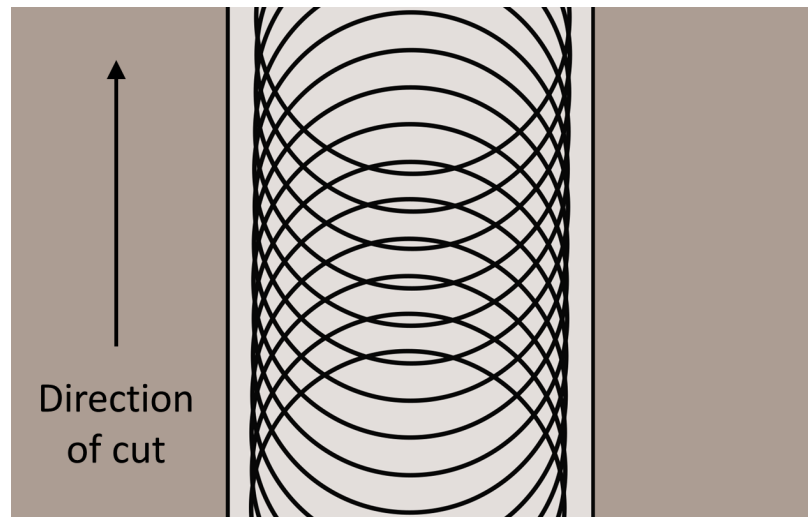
Path taken by milling cutter with tool starting and finishing clear of the work piece.
